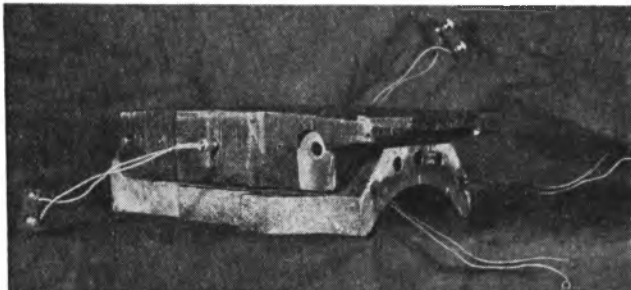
METHOD OF ATTACHING THERMOCOUPLES AND LOCATION IN BEARING AND WEDGE
